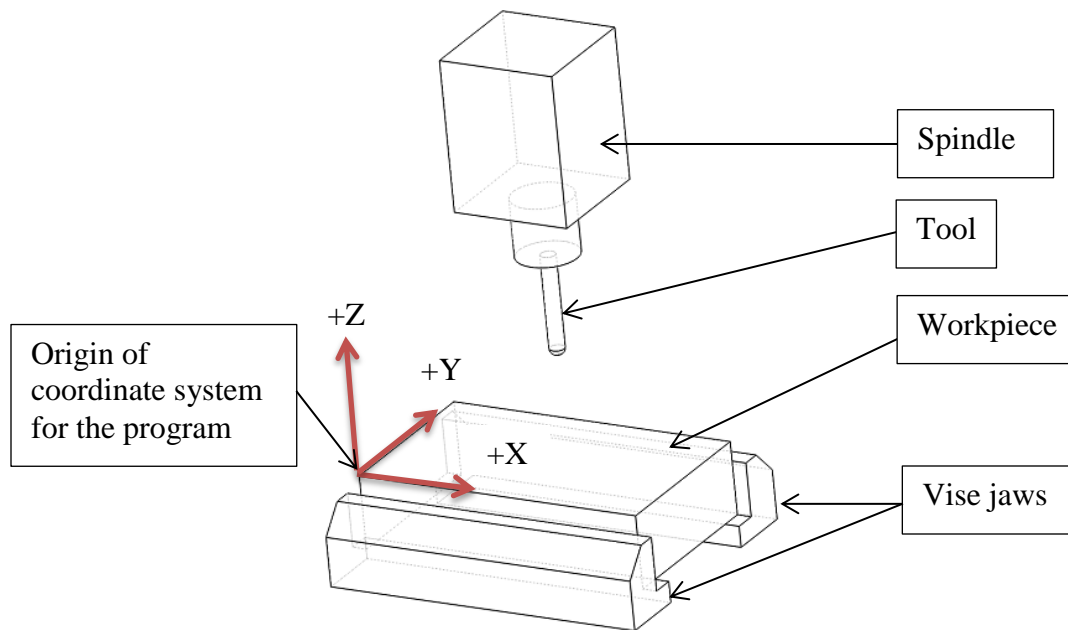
Coordinate System of the Workpiece on the HAAS OM2 CNC Milling Machine.
